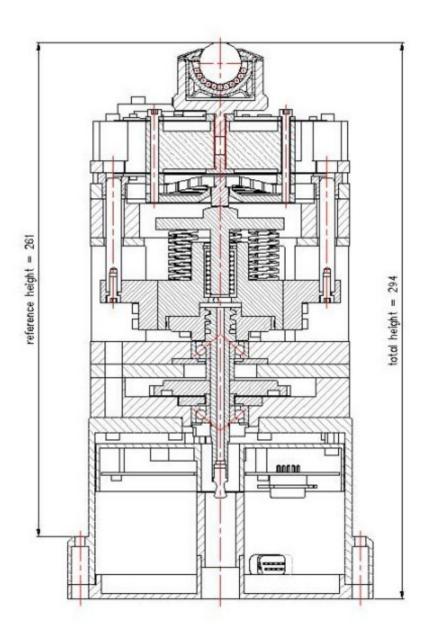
Axial Force Actuator to be mounted on ring nr.4, cross section view
